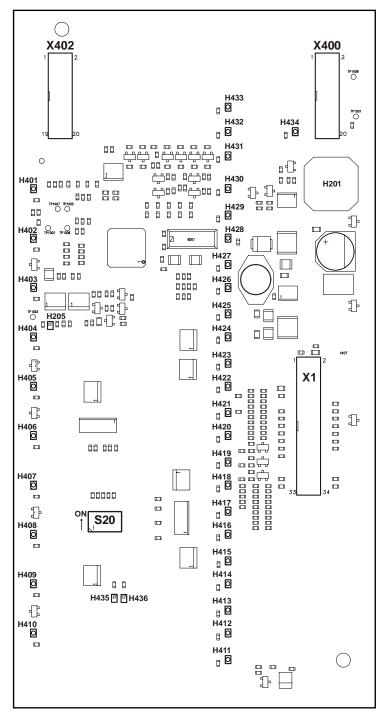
PCB view of EVAC-NL operating unit FTO2007-N1
